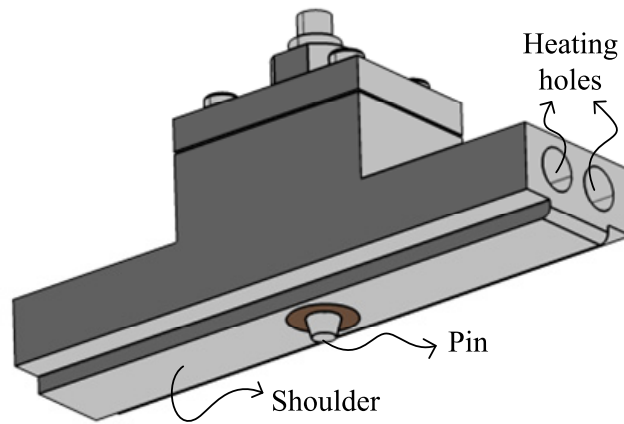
FSW tool with long stationary shoulder and conical threaded pin.
